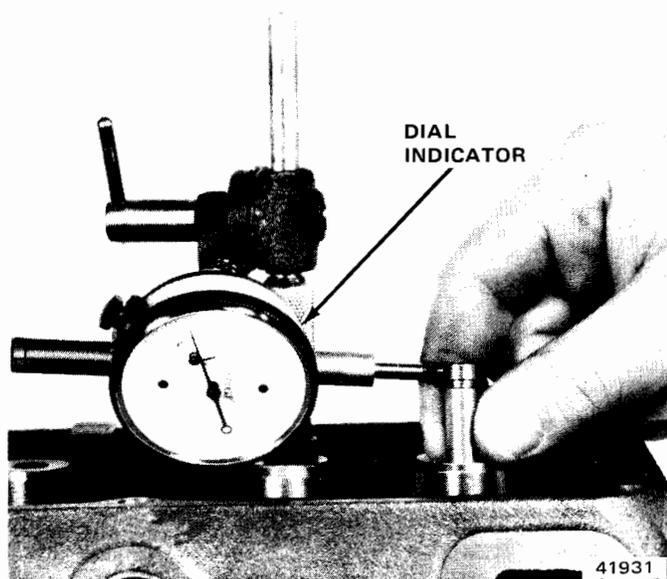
B-15 Valve-Stem-to-Guide Clearance Measurement
